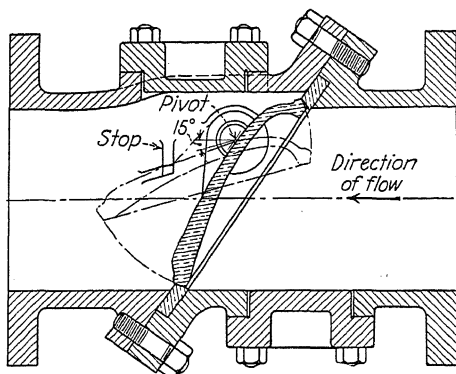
Nonslam tilting-disk check valve for reducing shock pressure on reversal of flow in water pipes. (Courtesy of the Chapman Valve Manufacturing Company.)
